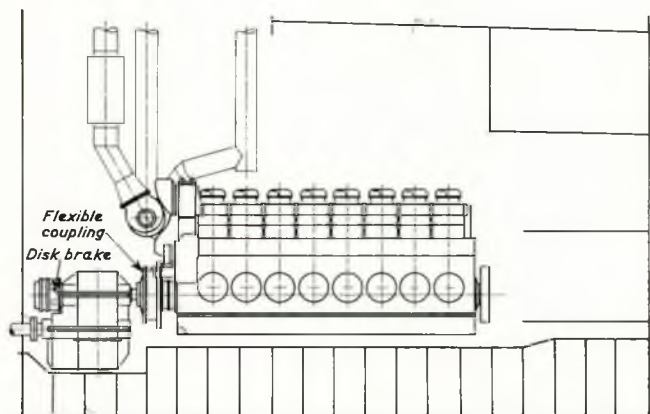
Engine room layout of cargo vessels Labrador, Bruly and Bongo
